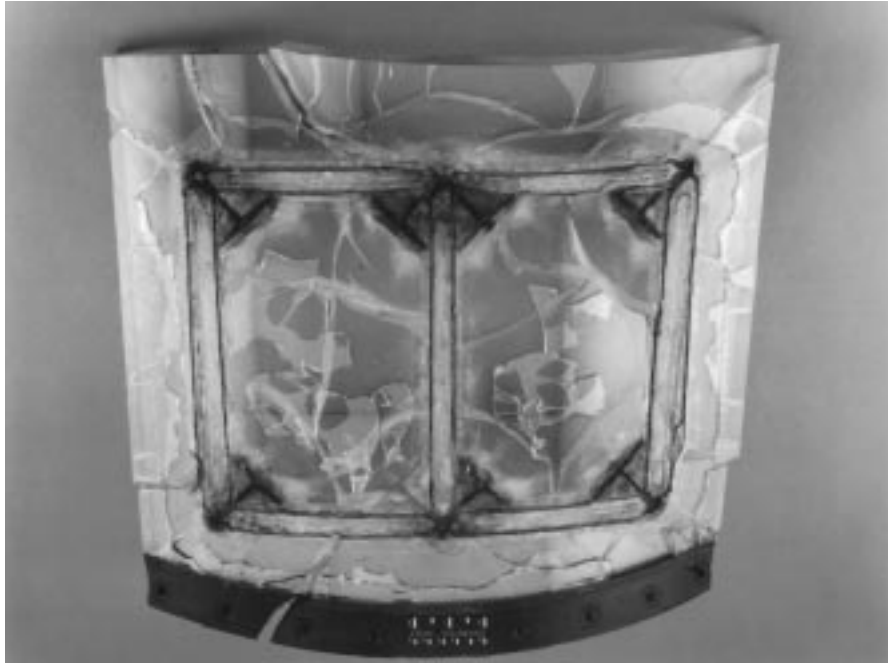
Results of explosively fractured mini-panel test, using "T" configuration in corners.
